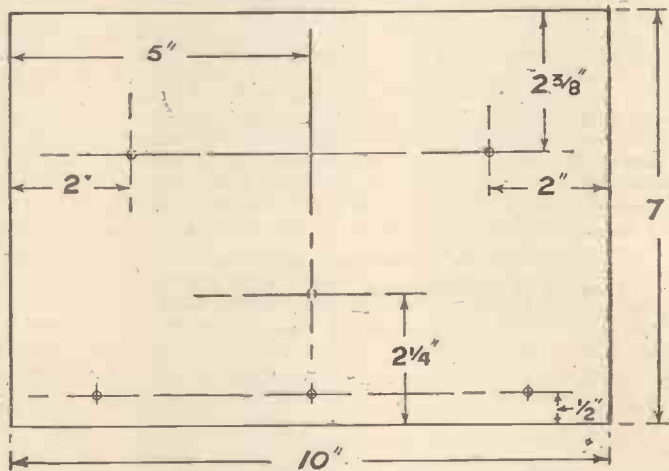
How the plywood or paxolin is marked out preparatory to drilling.
